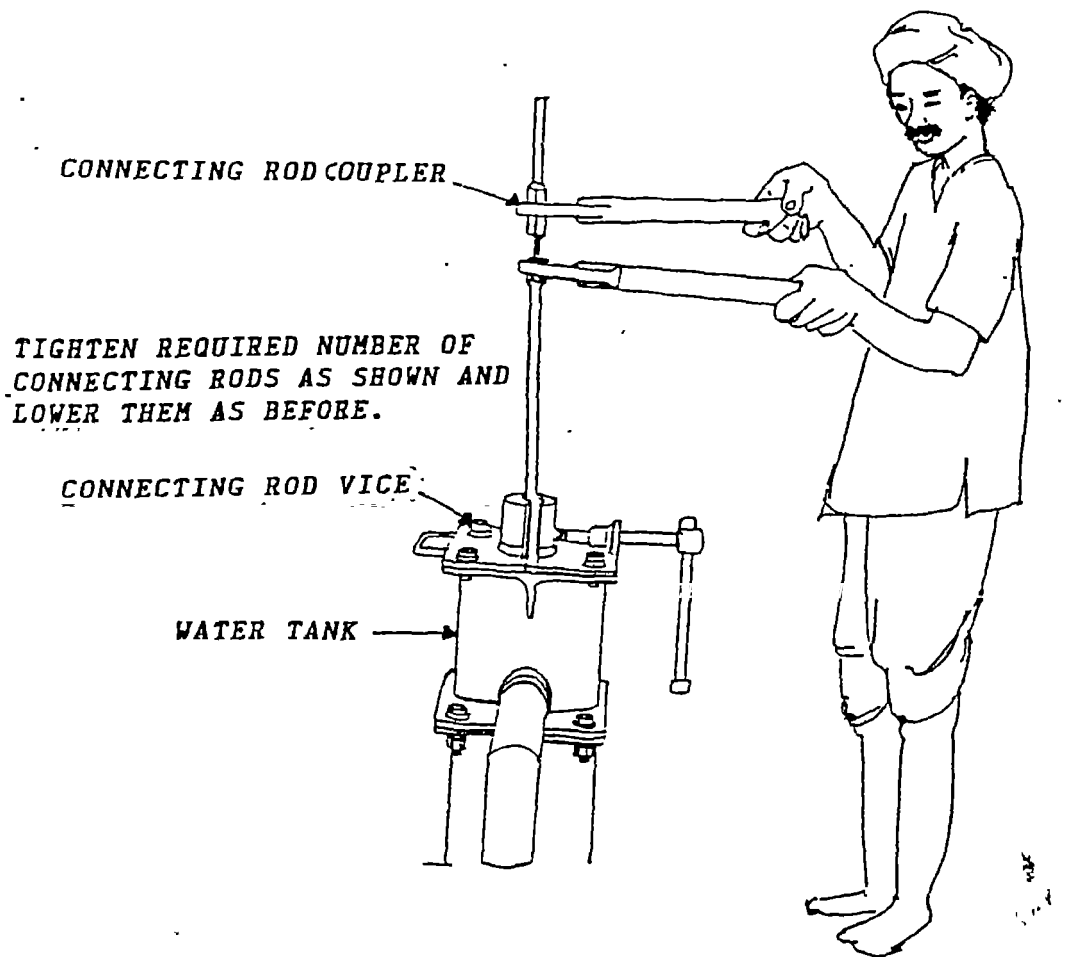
JOIN THE CONNECTING ROD AS PER REQUIREMENT.
